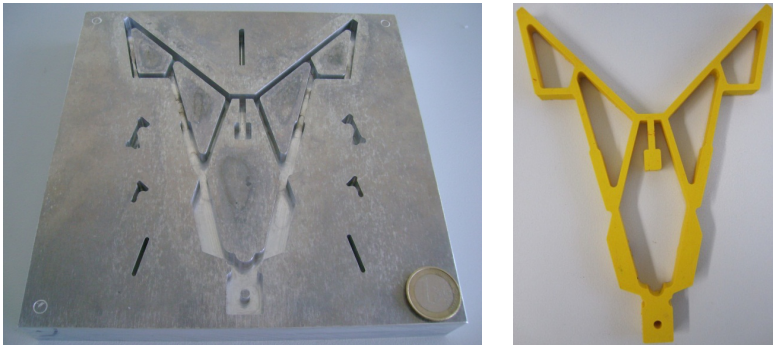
The gripper manufacturing process; a) the moulding tool, b) produced gripper
